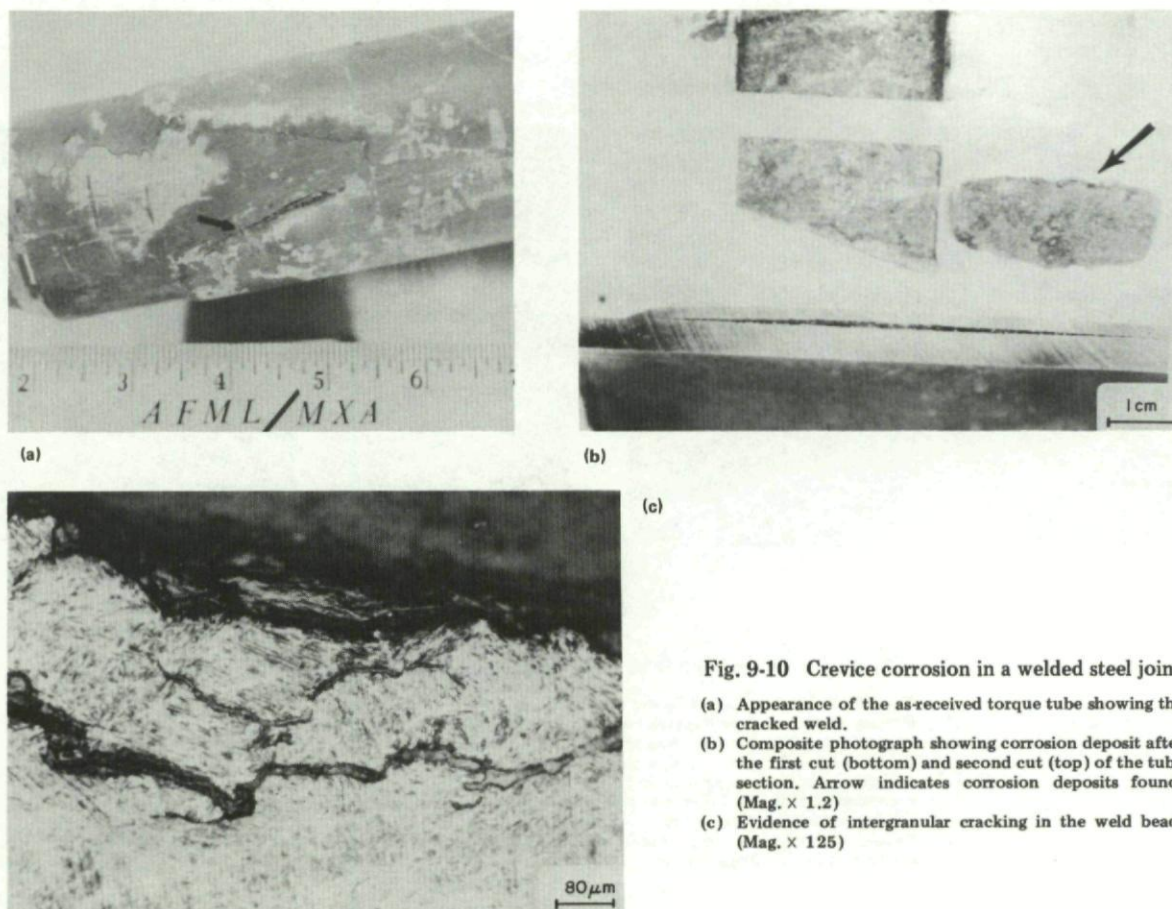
Crevice corrosion in a welded steel joint
